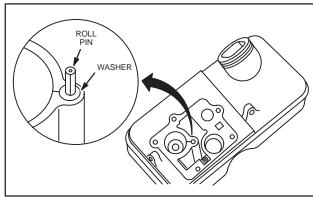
INSTALLING ROLL PIN AND TEFLON WASHER
